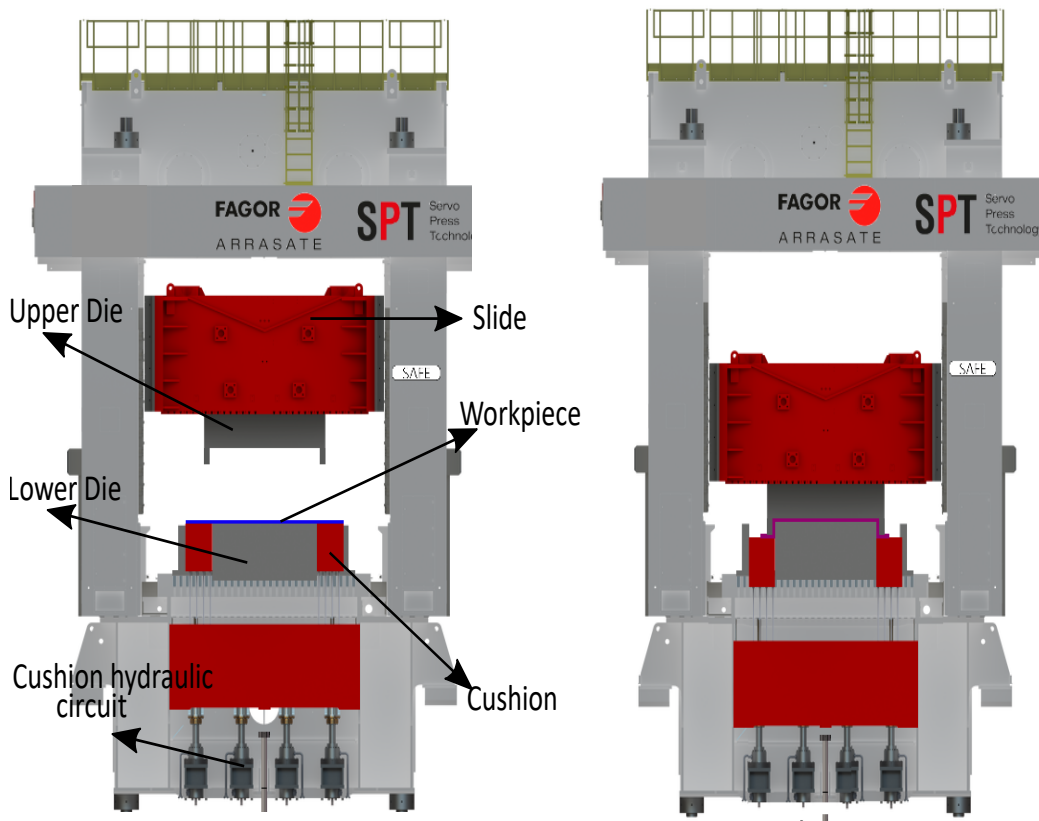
Mechanical press drawing, with mechanical slide and hydraulic cushion.
